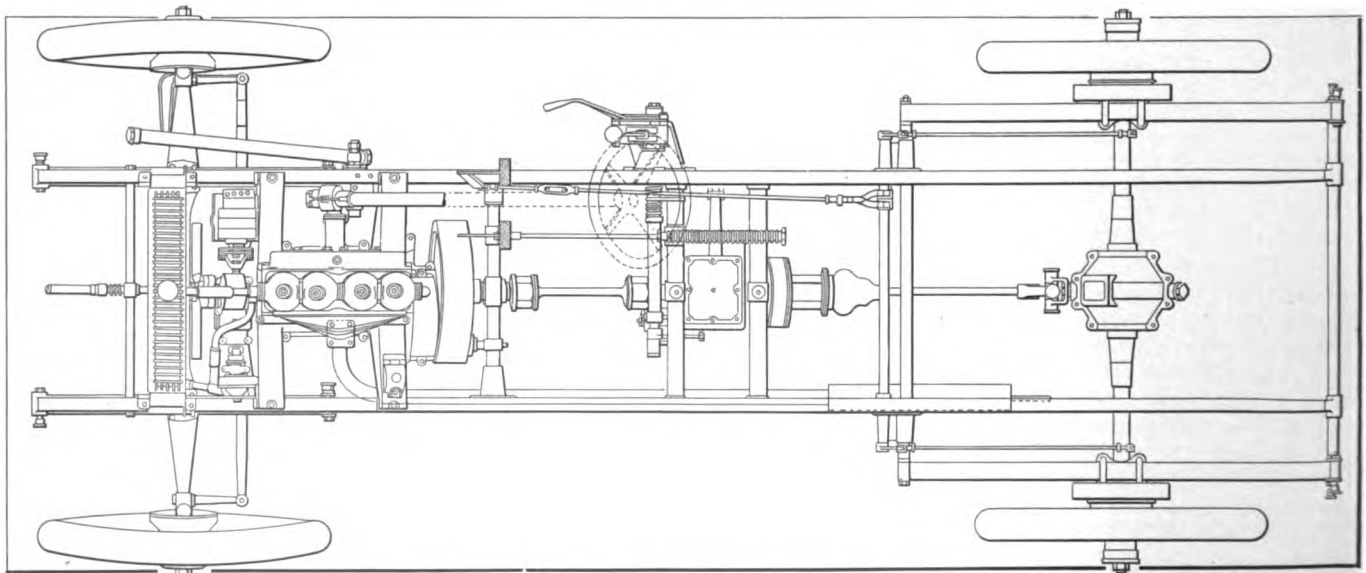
Plan view of Knight Daimler chassis, showing external clutch spring and double universal jointed shaft between gear box and engine
